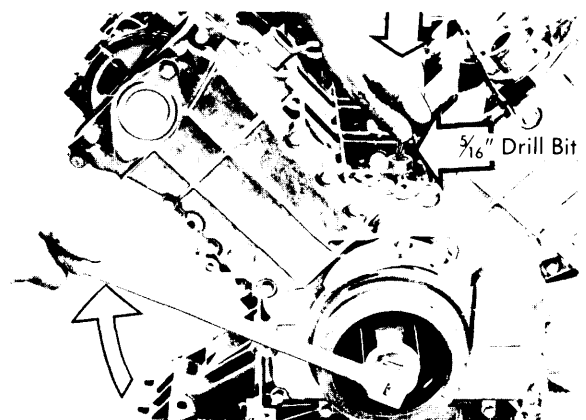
Locating Top Dead Center for No. 1 Cylinder
